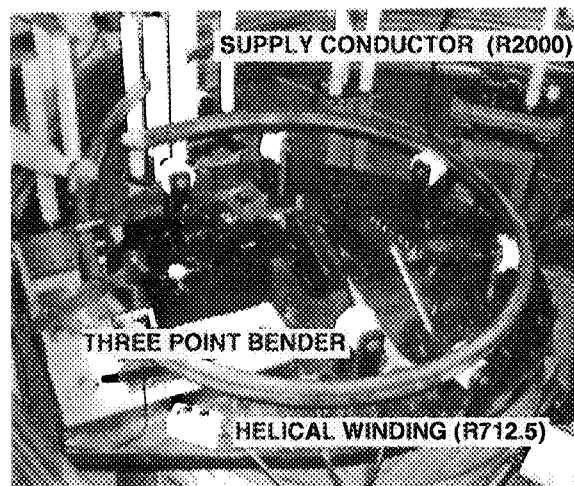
The winding machine of the helical winding of the CS insert coil
